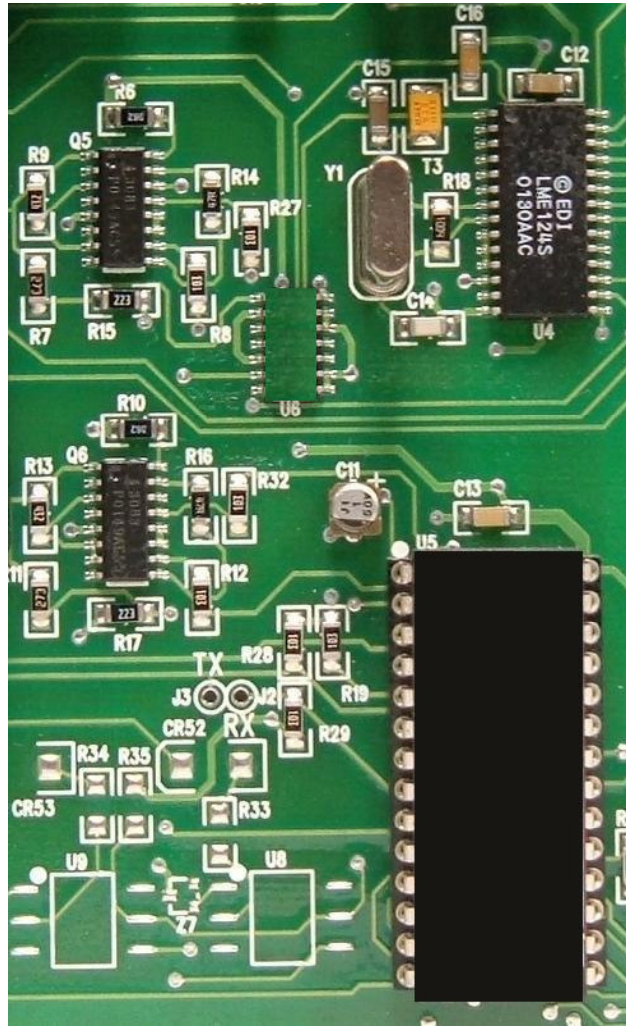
Example of a PCB with an assembly error, U6 is missing.
